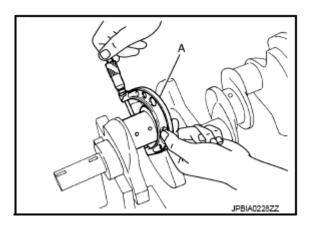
Measuring Outer Diameter Of Crankshaft Pin Journal Using Micrometer Courtesy of NISSAN NORTH AMERICA, INC.
